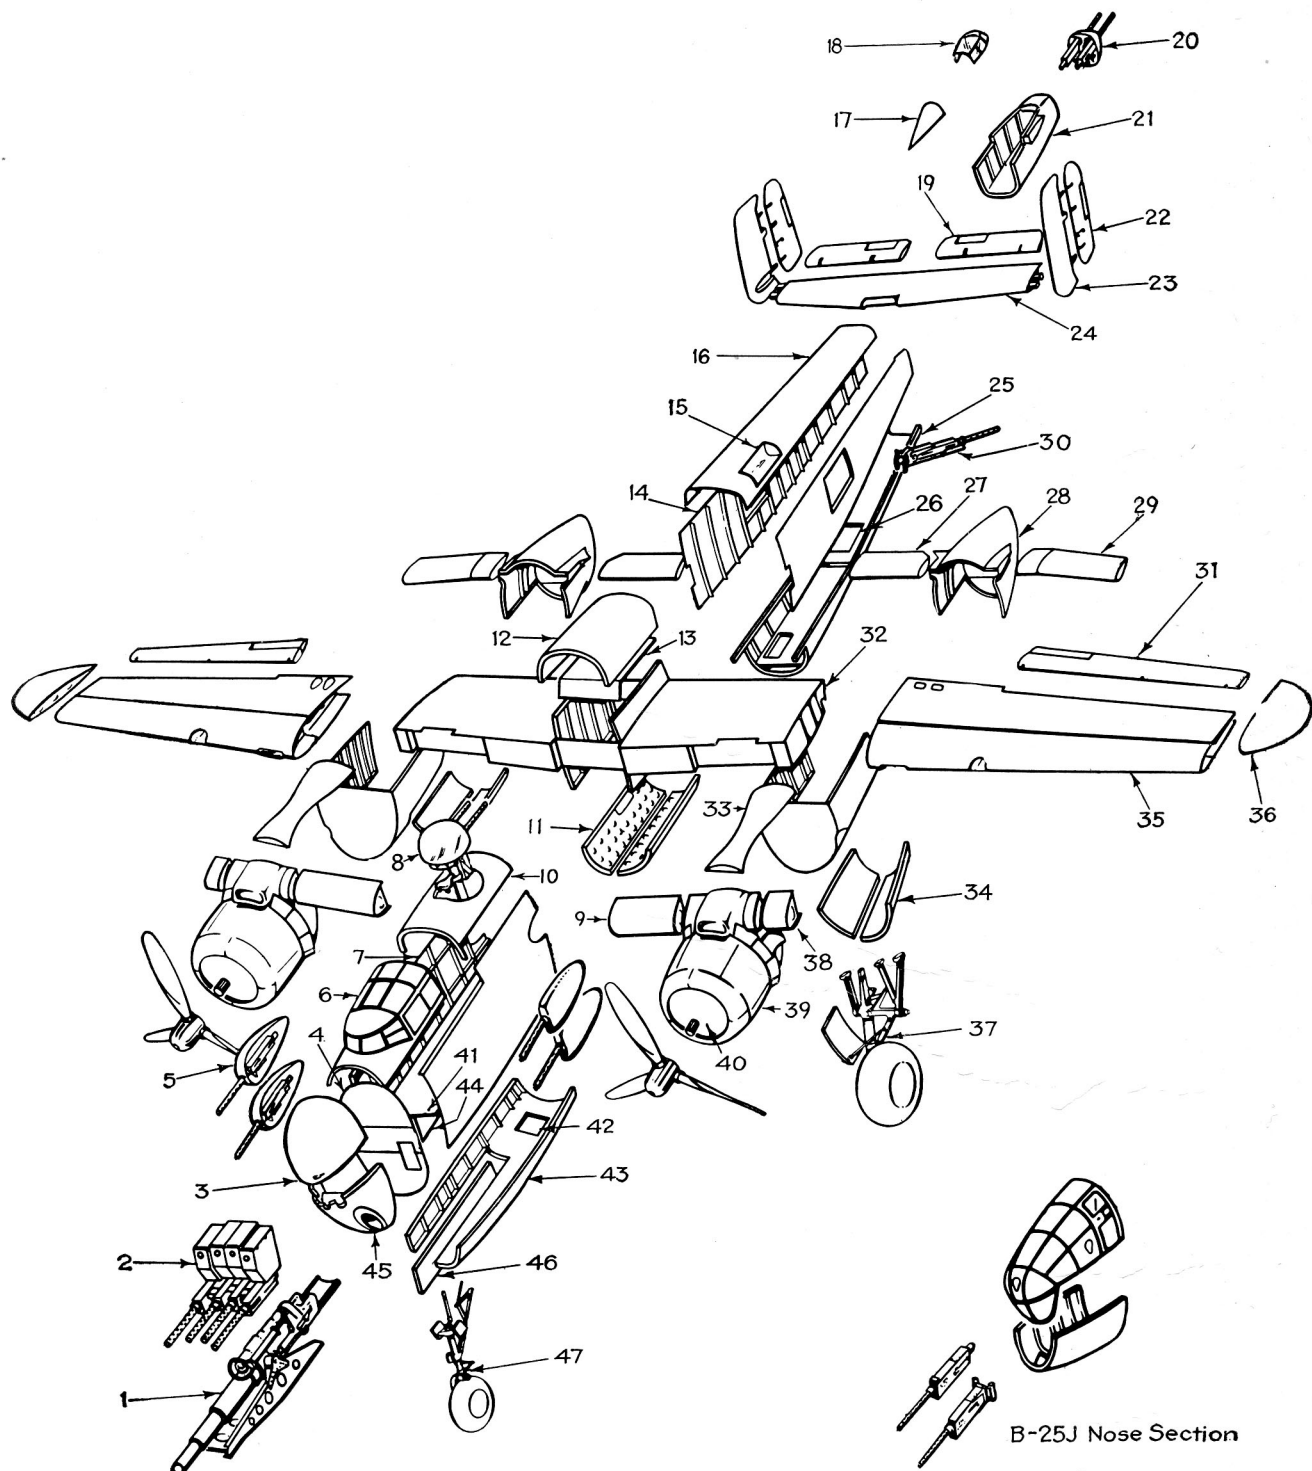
Exploded view showing details of B-25H and B-25J: (1) 75-mm cannon installation; (2) four fixed .50-caliber nose guns (B-25H); (3) nose assembly hood; (4) bulkhead; (5) .50-caliber blister guns; (6) pilot's enclosure; (7) fuselage front, side frame; (8) Bendix upper turret; (9) nose assembly, inboard center section; (10) fuselage front, top frame; (11) bomb-bay door; (12) fuselage top frame; (13) bomb-bay passageway floor; (14) rear fuselage side frame; (15) life raft; (16) rear fuselage, top frame; (17) horizontal stabilizer upper fairing; (18) tail gunner's canopy; (19) elevator; (20) Bell tail turret; (21) tail gunner's compartment; (22) rudder; (23) vertical stabilizer; (24) horizontal stabilizer; (25) rear fuselage, bottom frame; (26) rear entrance hatch; (27) inboard flap; (28) nacelle; (29) outboard flap; (30) .50-caliber waist gun; (31) aileron; (32) wing center section; (33) nacelle upper fairing; (34) main landing gear doors; (35) outer wing panel; (36) wing tip; (37) main landing gear; (38) nose assembly, outboard center section; (39) cowling; (40) power plant; (41) pilot's floor; (42) front entrance hatch; (43) fuselage front, bottom frame; (44) fuselage beam; (45) lower nose assembly (B-25H); (46) nose landing gear door; (47) nose landing gear. The nose section of the B-25J shown at the lower right has fixed and flexible .50-caliber guns.
